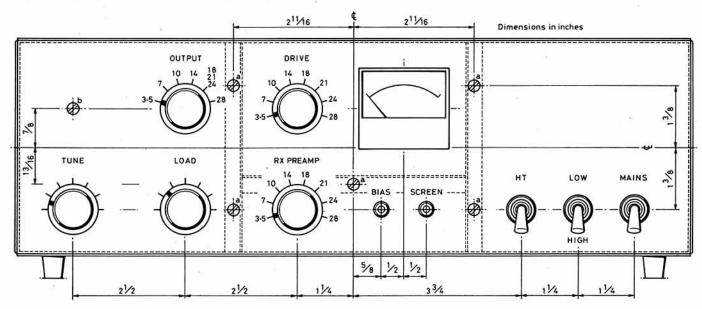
Front panel layout. (a) 4BA or M3 screw holding front panel to screen or chassis. (b) 4BA or M3 screw for fixing L1. (c) LED in plastic mount. The spindle for the *Tune* control passes through a bush fitted in a 0-375in hole. The spindle for the *Load* control passes through a 0-375in hole without a bush fitted
